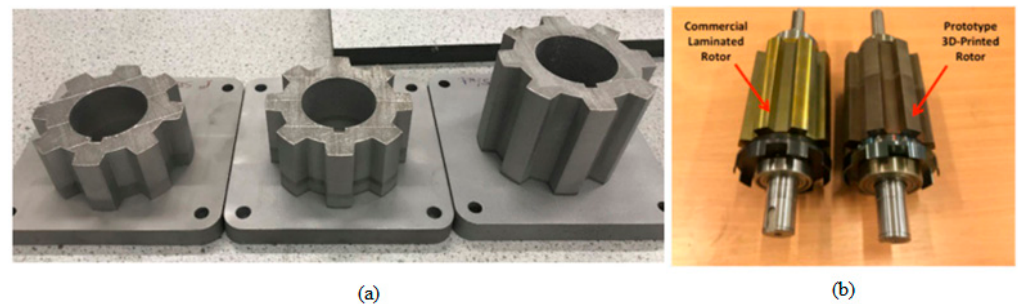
3D-printed SRM rotor: (a) 3D-printed segments of rotor; (b) Commercial and 3D-printed assembled rotor [39,40].
